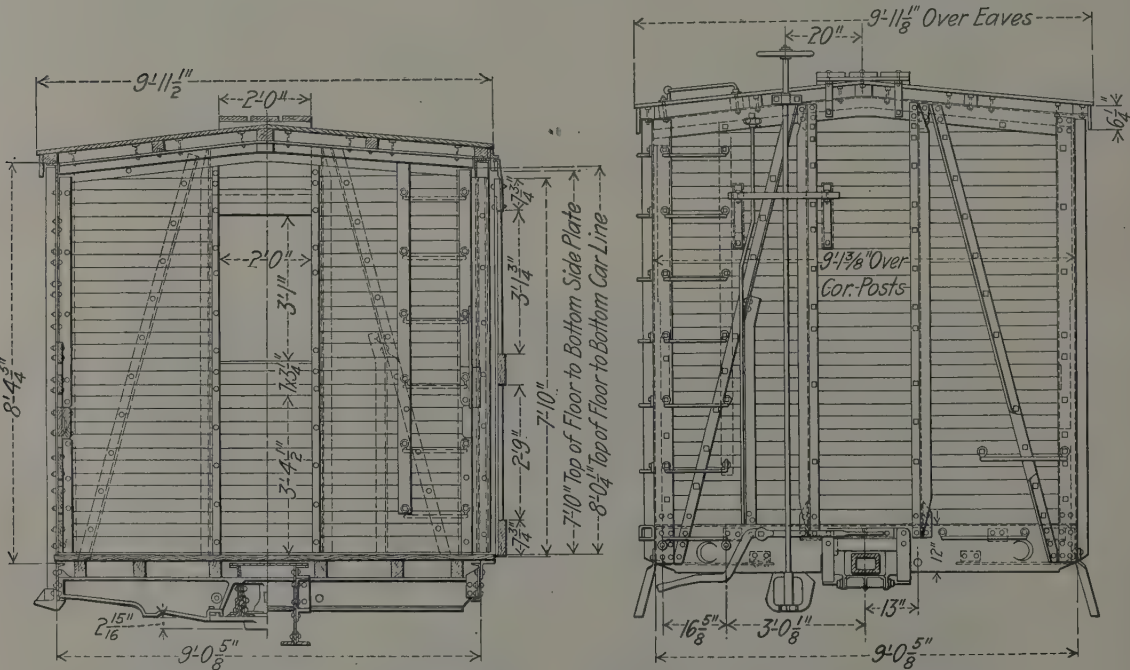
Cross Sections and End Elevations of 40-Ton Stock Car Shown in Figs. 186 and 188.
